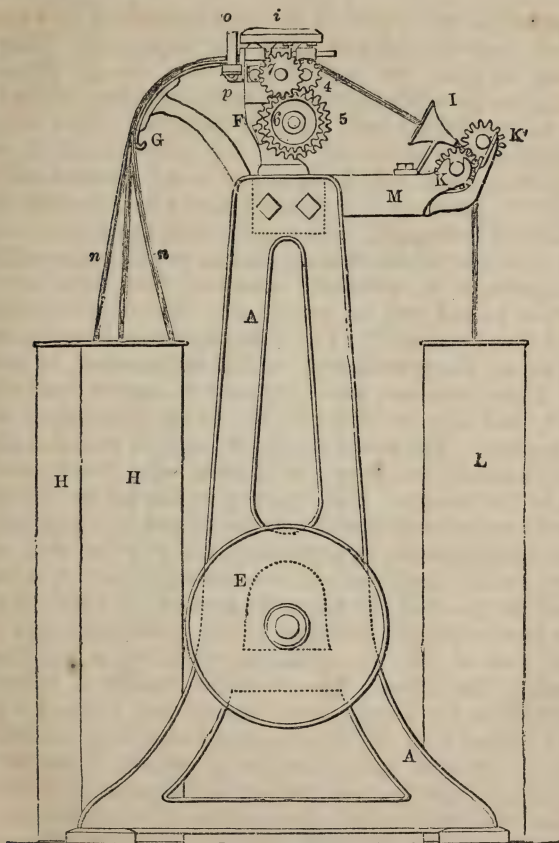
End view of the Drawing Frame. Scale, one inch to the foot.
